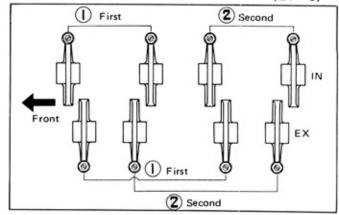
Valve Clearance Adjustment Order (20R)
